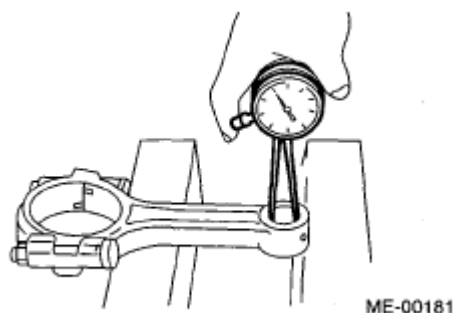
Checking Clearance Between Piston Pin And Bushing
